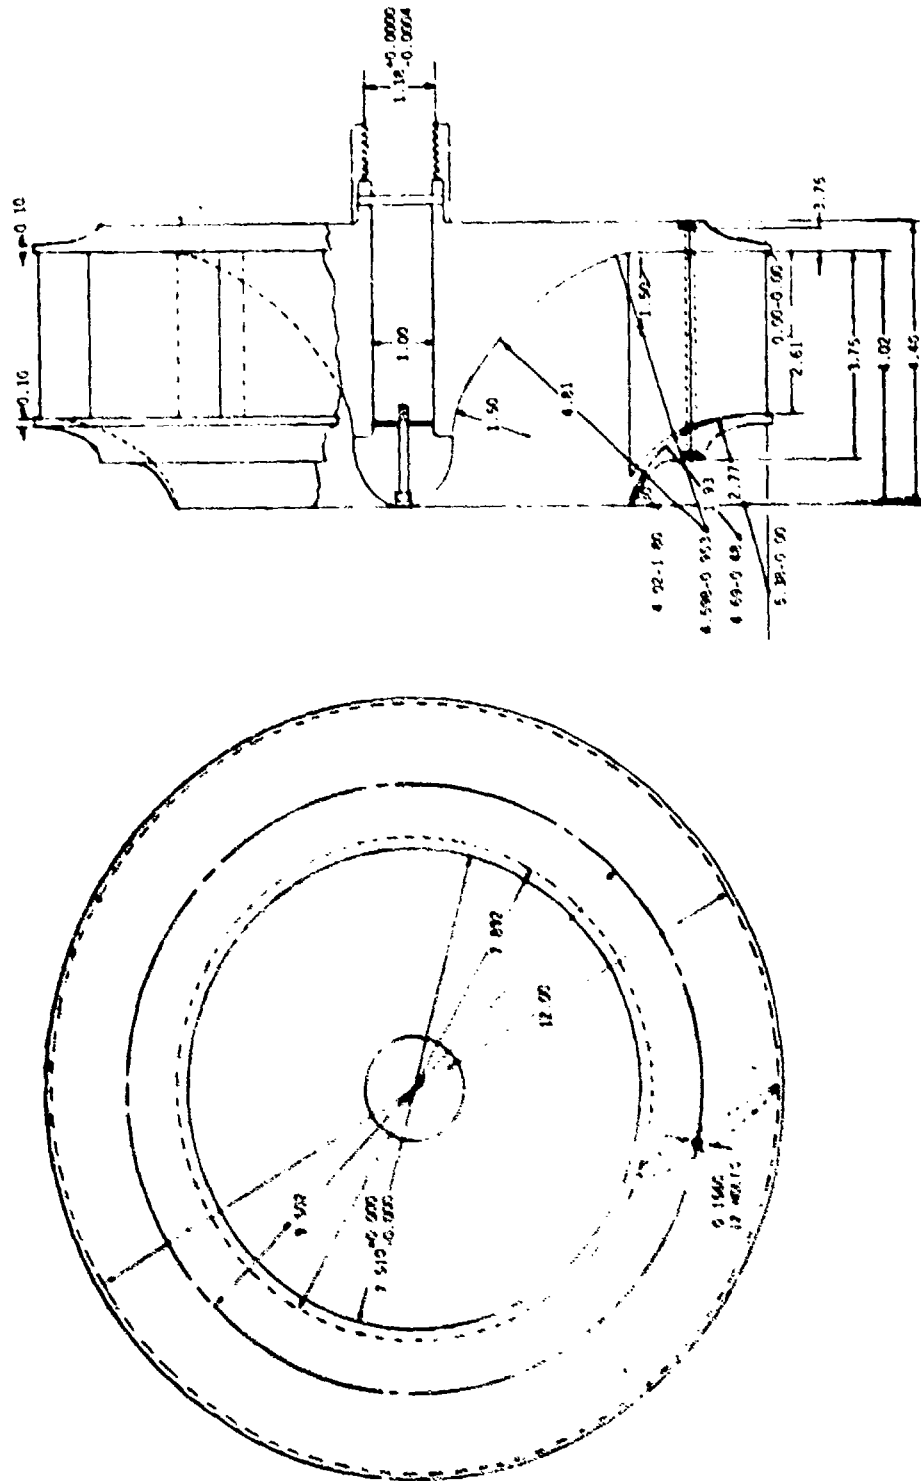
CENTER SHOP DRAWING OF 12-INCH-DIAMETER JEFF(B) MODEL IMPELLER
